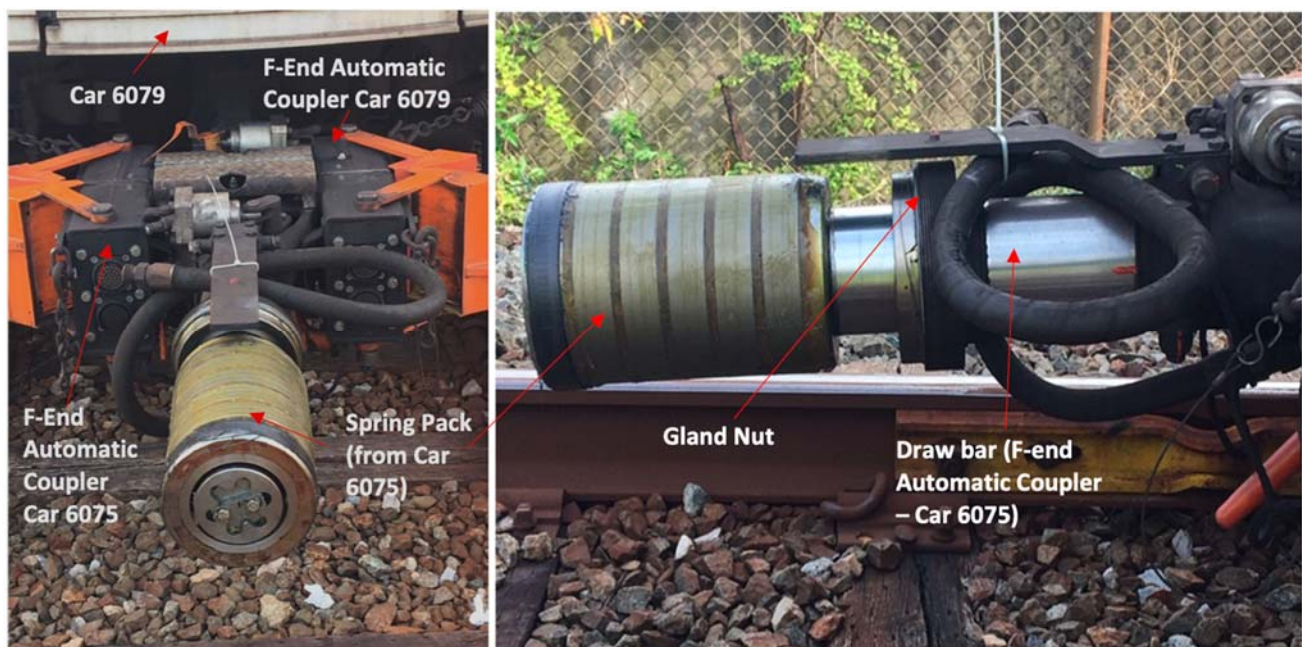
Car 6079 – Front view of pull-apart (Spring pack with Automatic Couplers connected)
